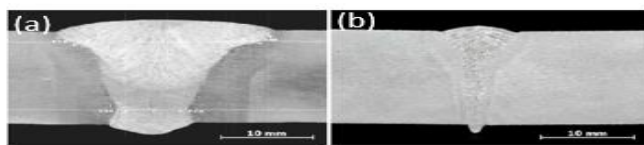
Comparison of the weld bead profile (a) Submerged arc welding (b) Gas metal arc welding [8]
